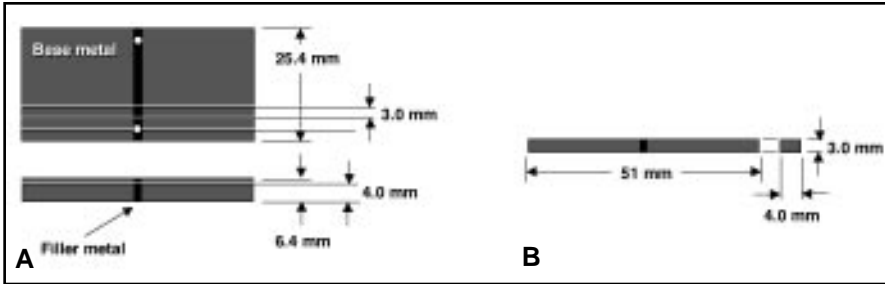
A — Schematic diagram showing fabrication of test pieces from the brazed parent blocks; B — dimensions of the four-point bend bars used in the mechanical tests corresponding to MIL-STD-1942A, Type B geometry.
